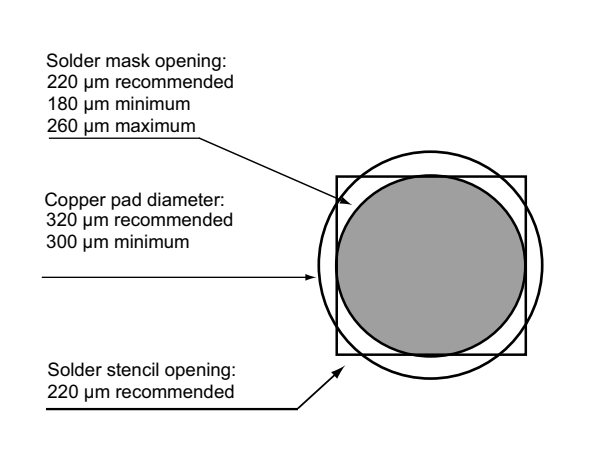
Footprint - 5 mils stencil - non solder mask defined
